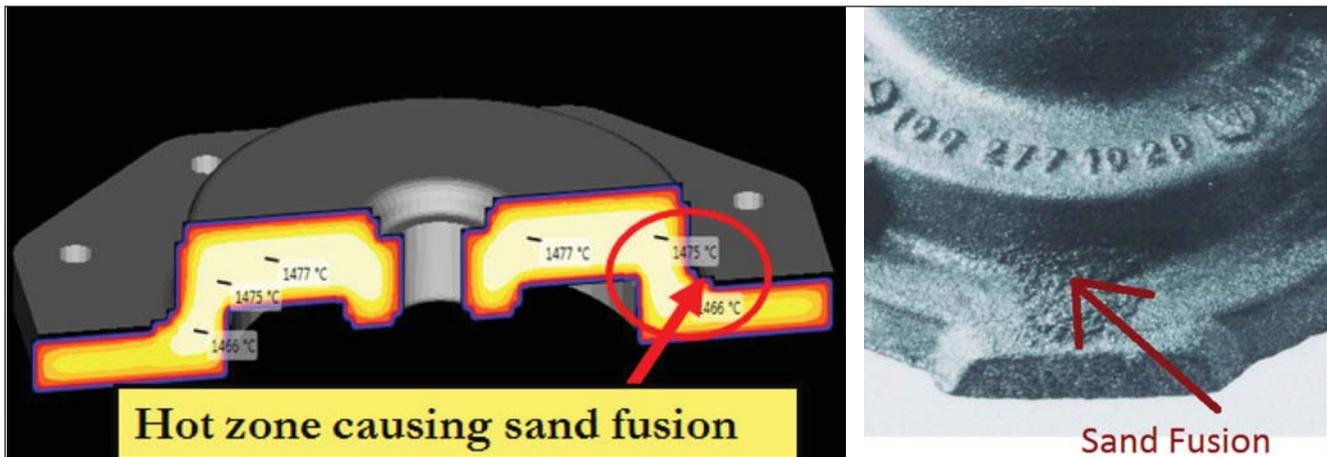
Simulation view of Hot Zone of Pivot casting causing sand fusion.
